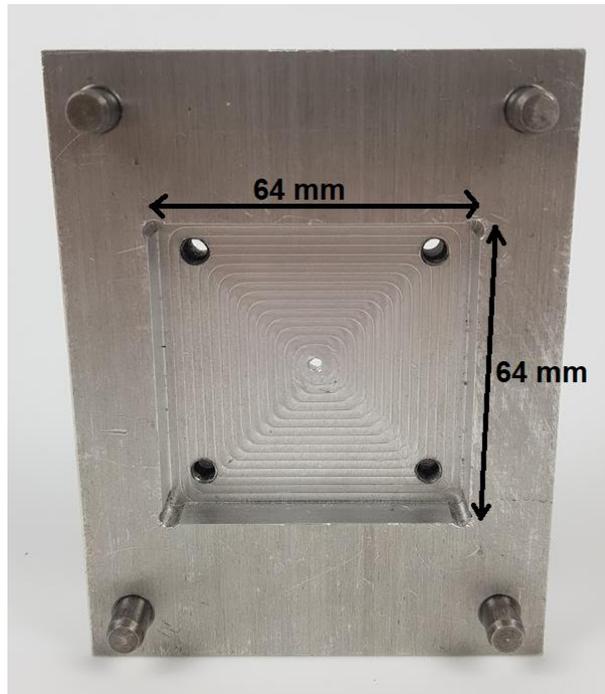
The MCP Minimolder with the transparent cover removed.
